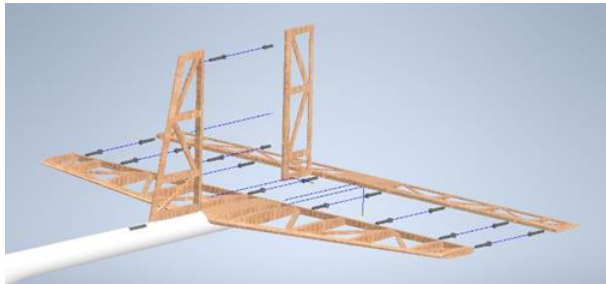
AutoCAD INVENTOR tail surfaces construction model
